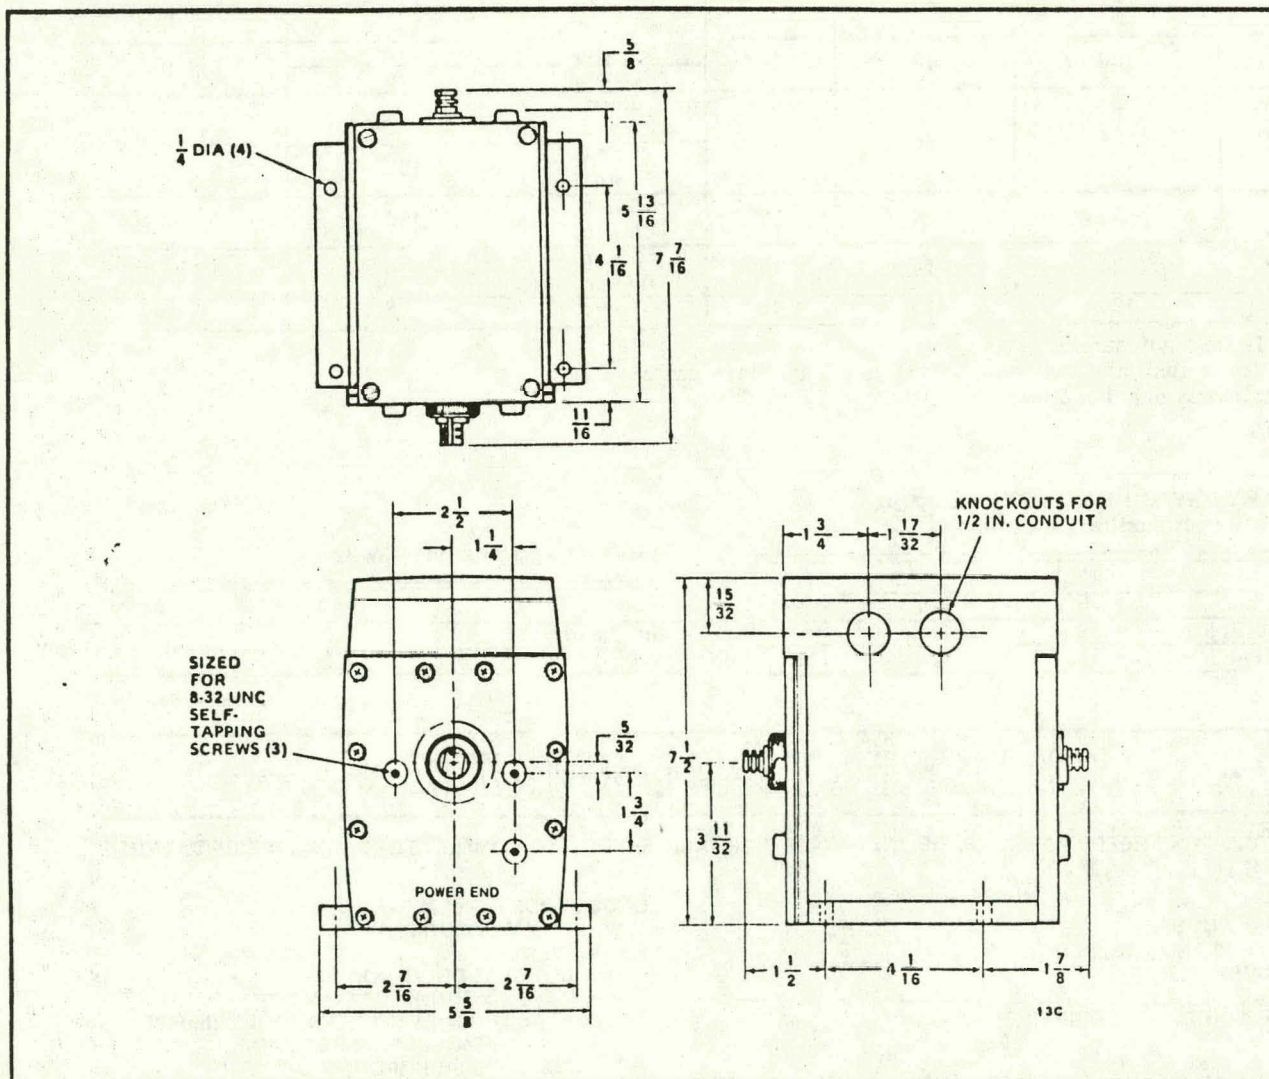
APPROXIMATE DIMENSIONS OF THE M644 MODUTROL MOTOR IN INCHES.
